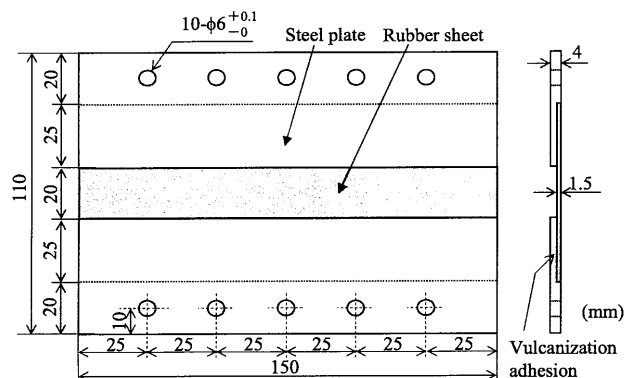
Shape and dimensions of fatigue crack growth test.
